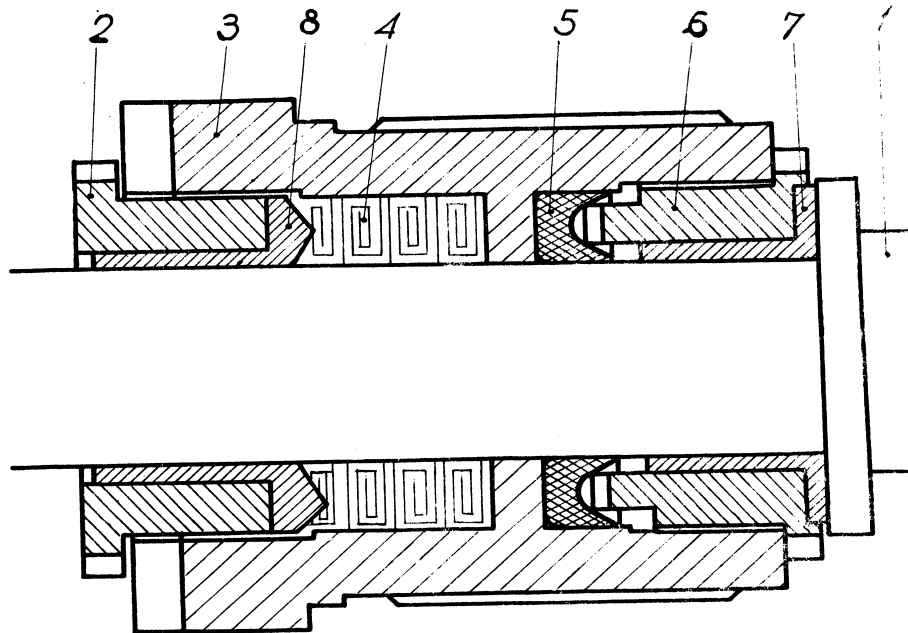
RECOIL BRAKE FRONT STUFFING BOX ASSEMBLY
